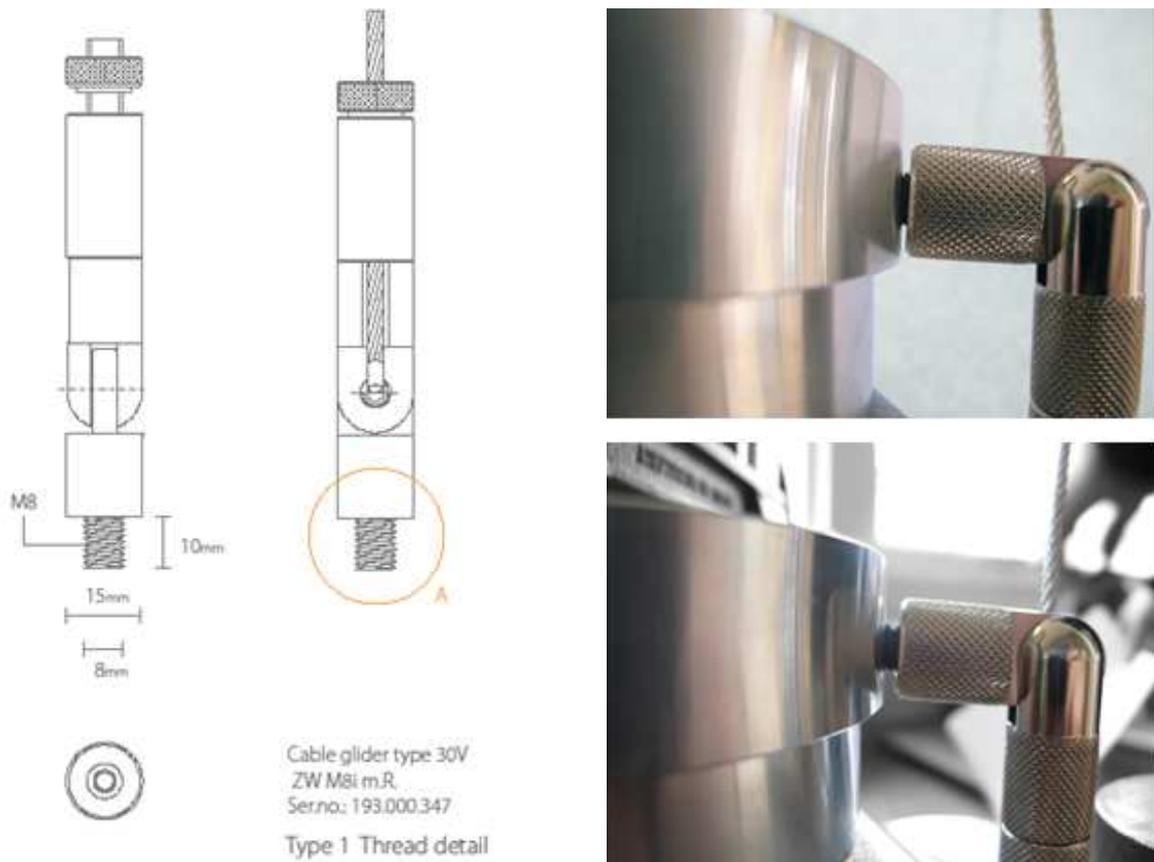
Grip-glider drawing (left) and Load testing of the screw-end for bending and deflection (right)
